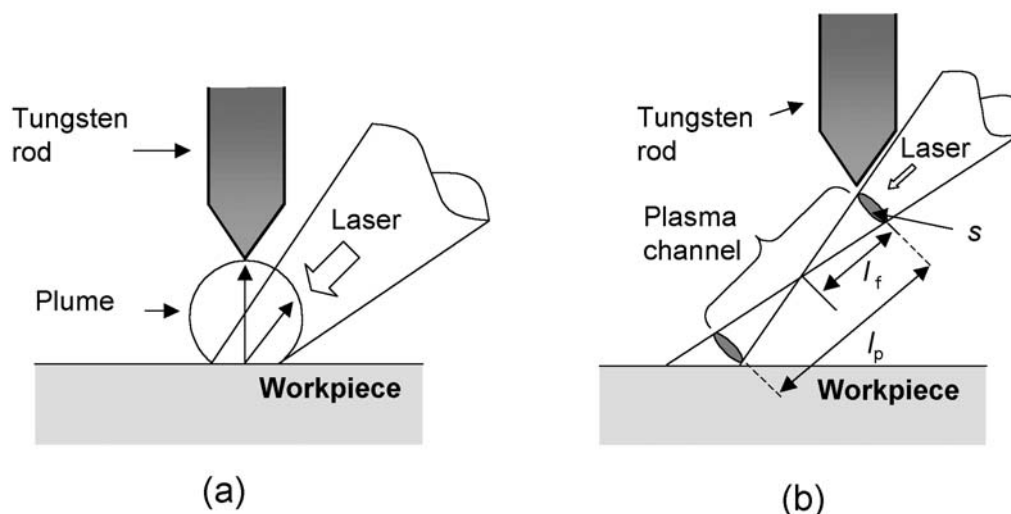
Principle of triggering arc discharge in the TIG arc welding using (a) a plume and (b) a plasma channel produced by pulsed laser focusing.
